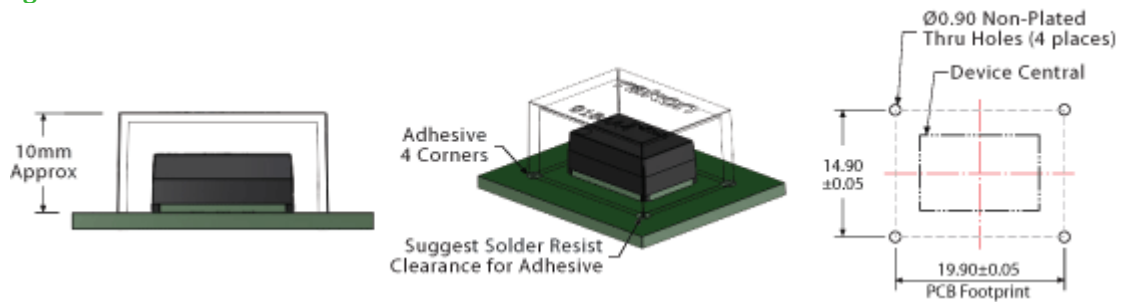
Shows how the cover can be placed on the pcb with a 9x7 device; Figure 4 shows how the cover can be placed on the pcb with a 14x9 device.
